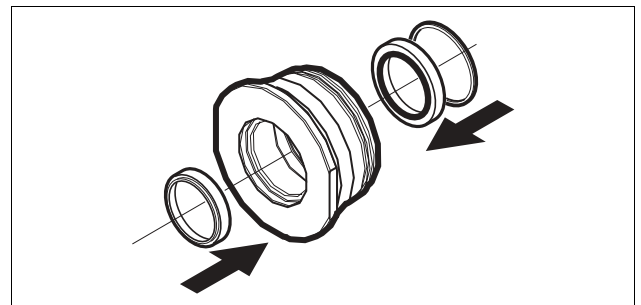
Assemble the dust seal, the seal and the retainer ring to the gland
